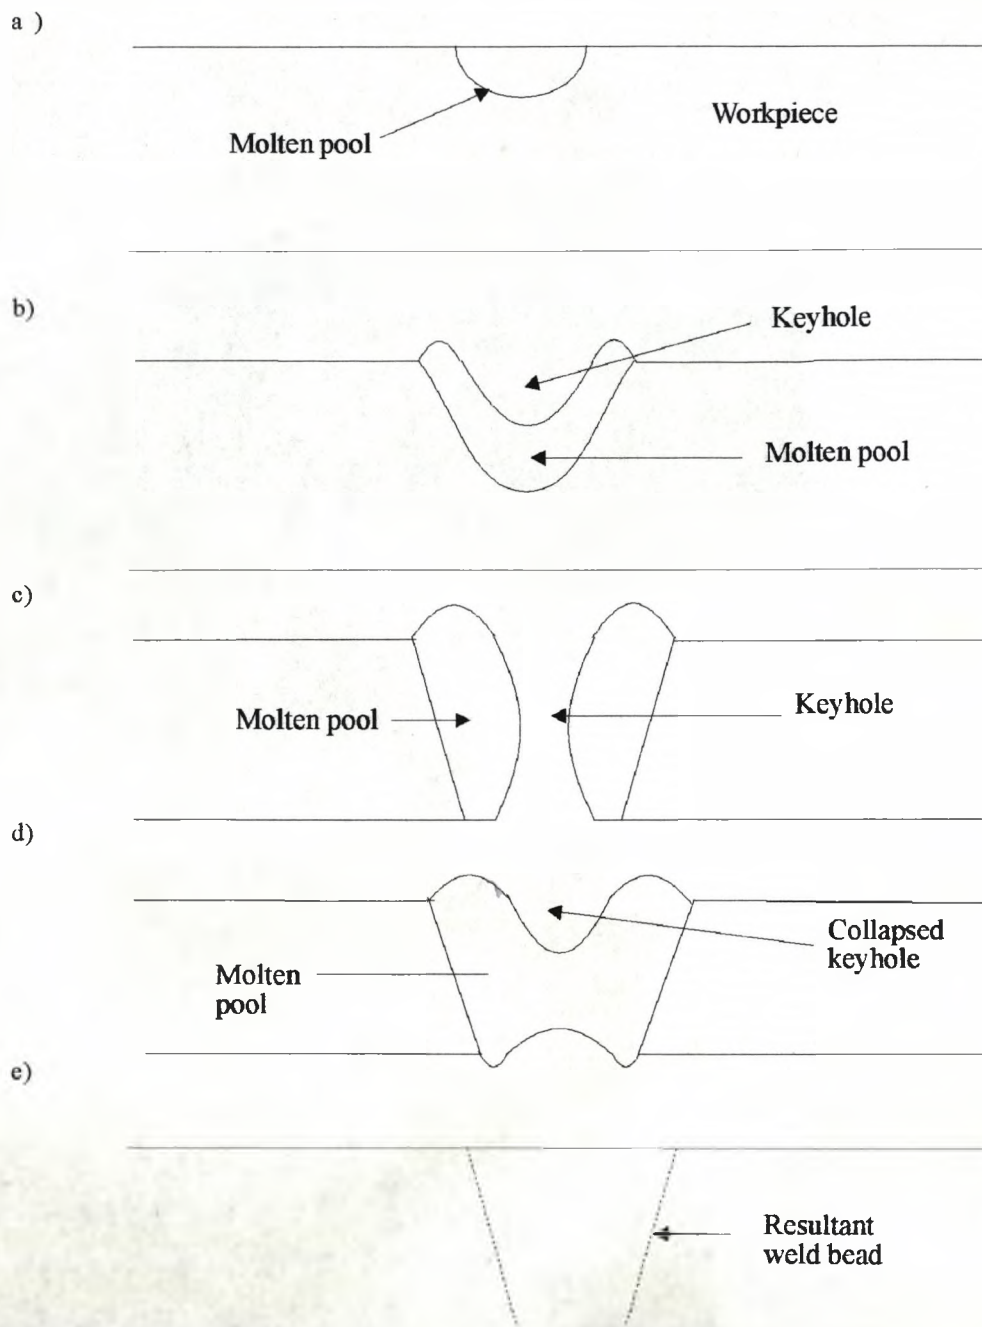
Schematic diagram showing the stages of pulsed laser keyhole welding; a) Initially the beam heats the workpiece, and causes melting, b) the workpiece absorbs enough energy to form a partially penetrating keyhole, c) in full penetration welding, the pulse is long enough to form a keyhole throughout the material, d) Once the pulse has ended, the keyhole collapses, and cooling takes place, leaving a weld bead along the seam.
